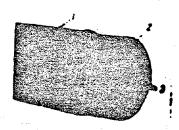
Front end of the head of the device for finishing and straightening abrasive wheels.
